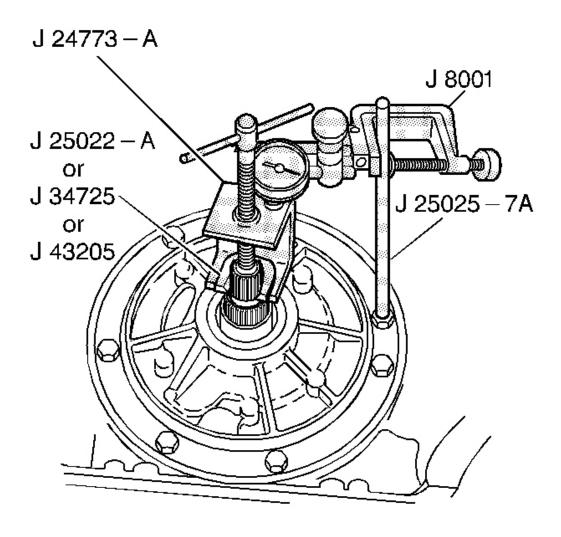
Installing J 25025-7A With J 8001 Courtesy of GENERAL MOTORS CORP.
